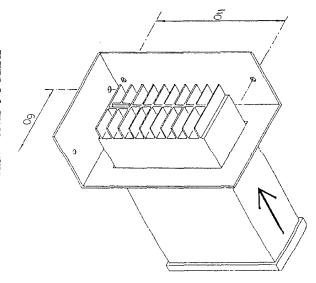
CHASSIS MOUNTING BRACKET
